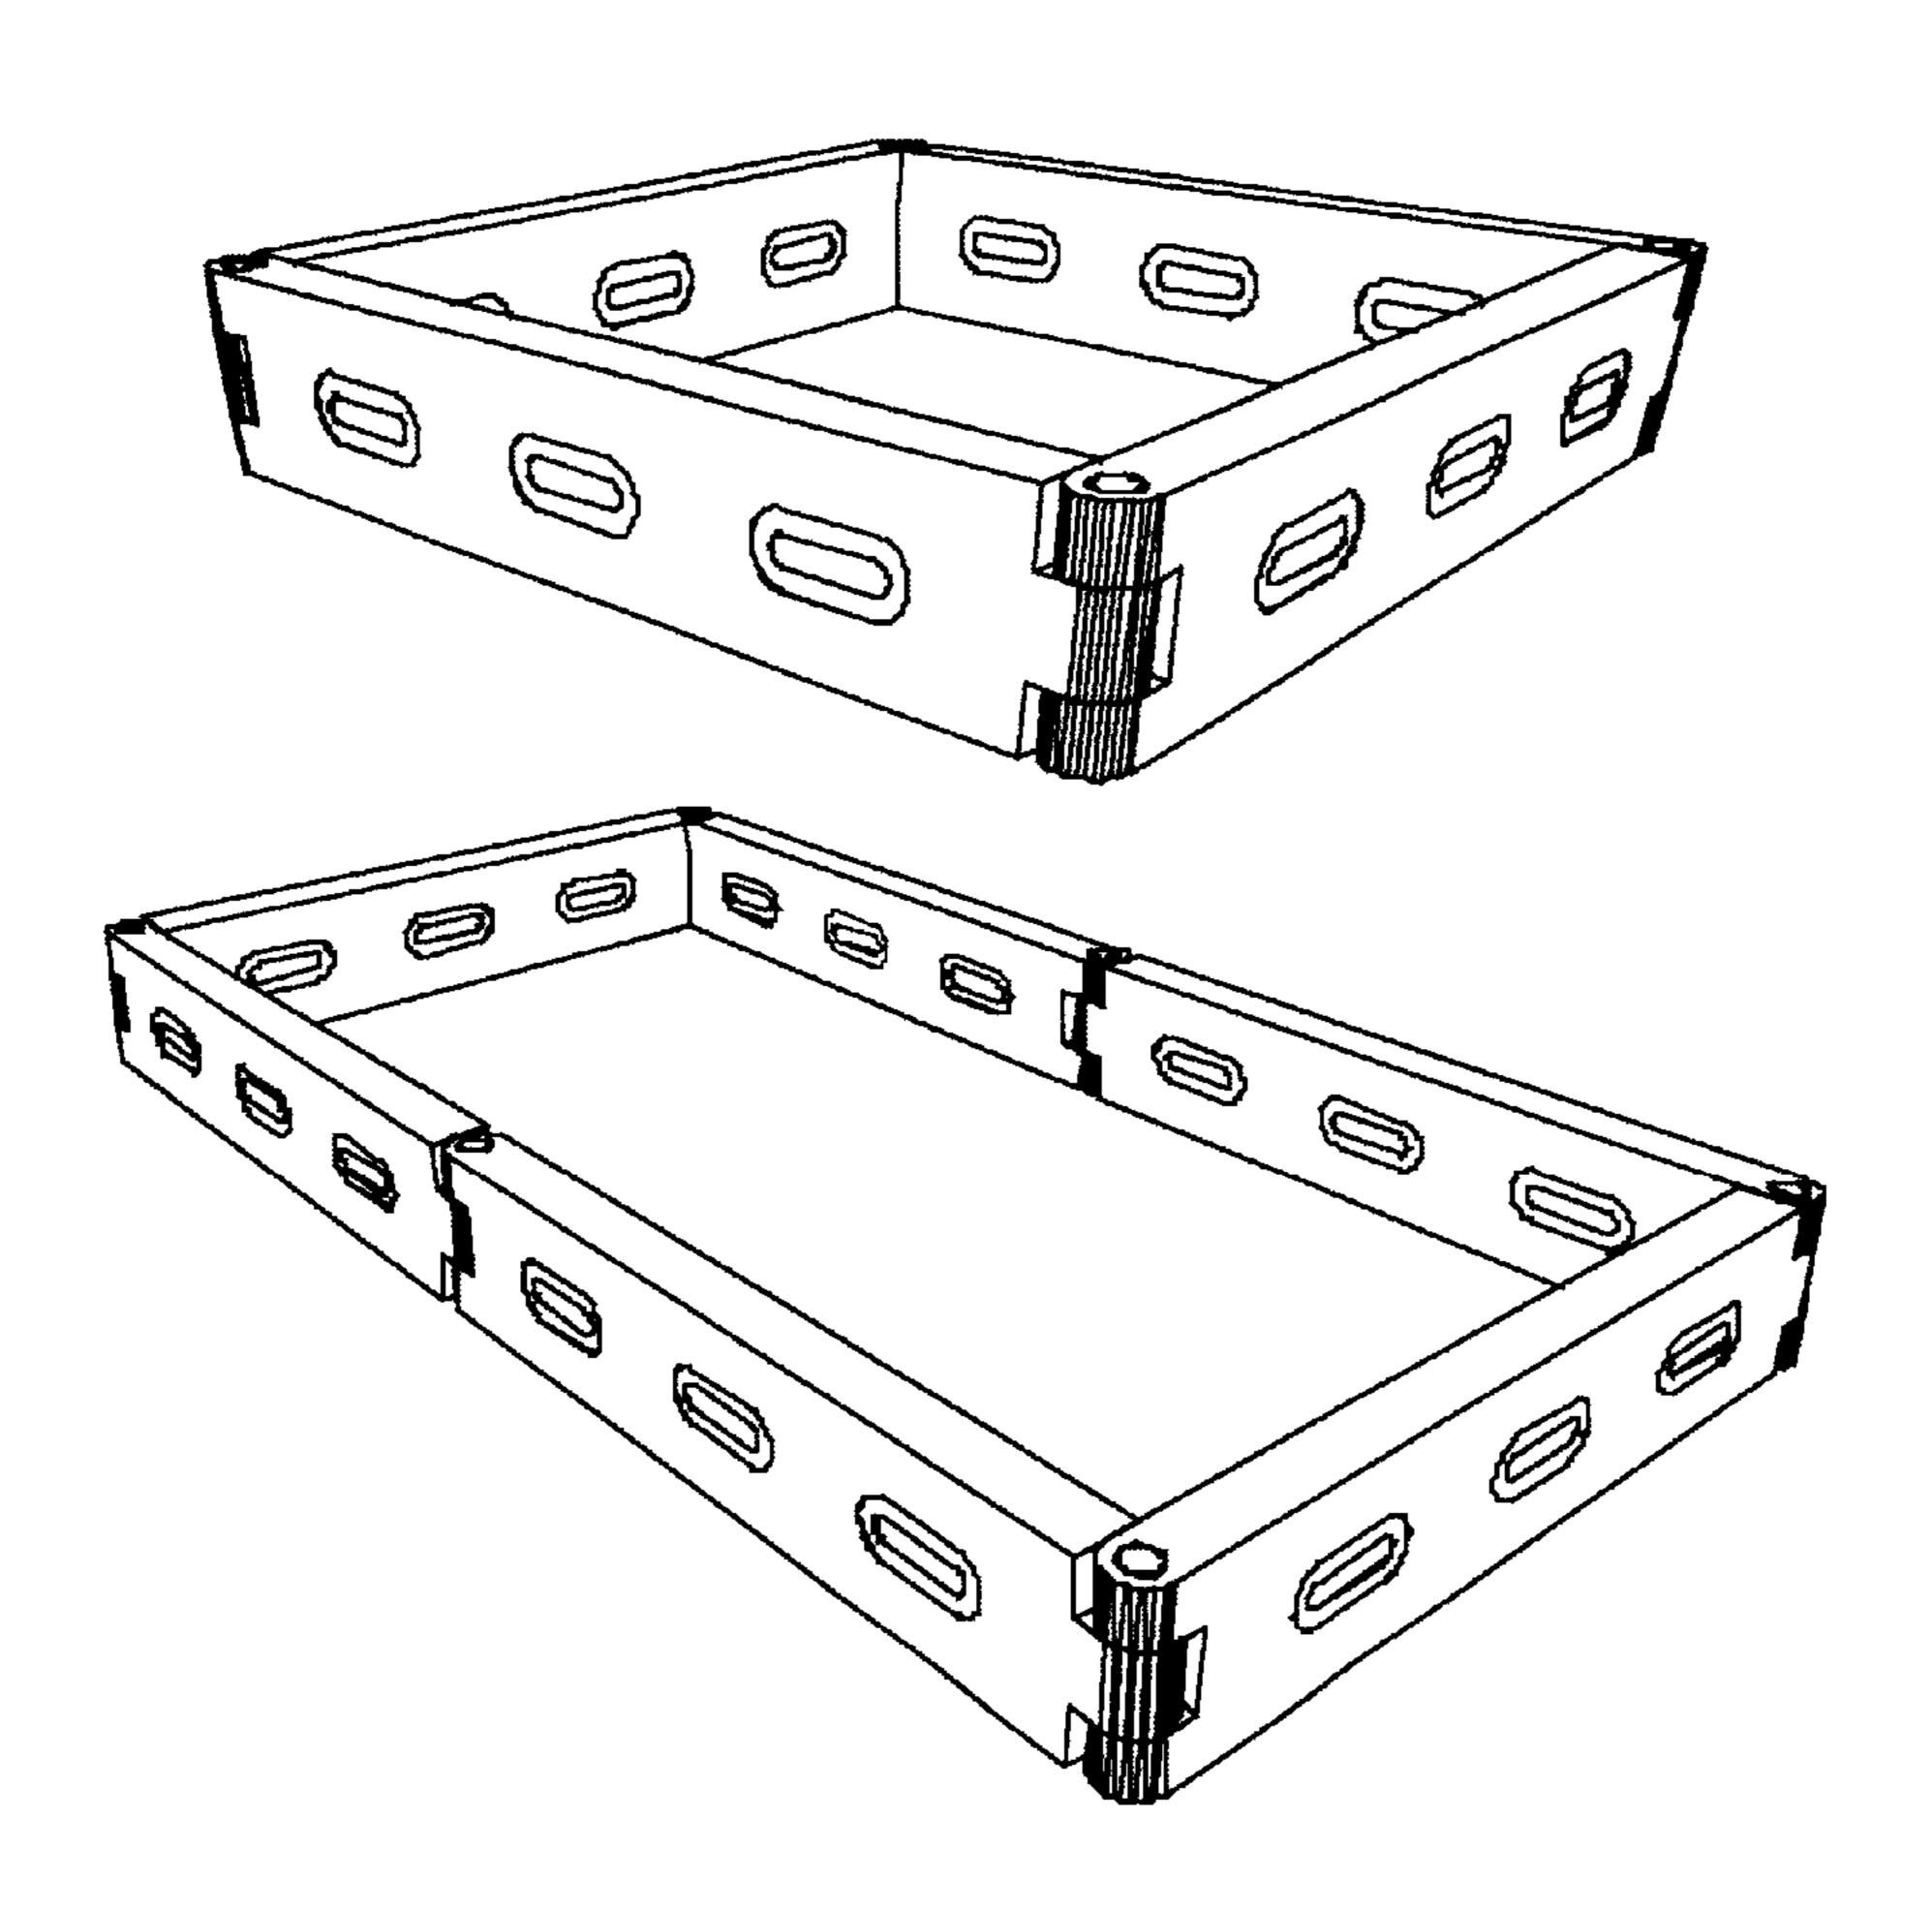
is a perspective view of a second embodiment of the design shown in FIG. 1;
